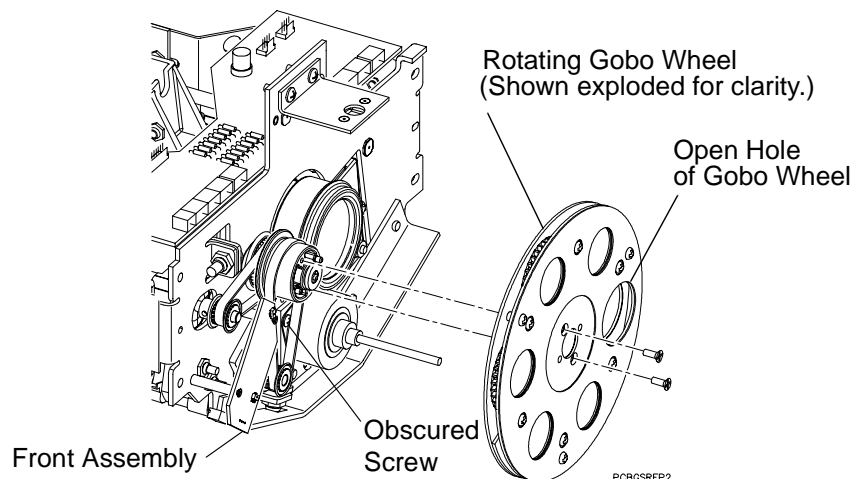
Accessing Edge Motor Assembly Attaching Hardware
